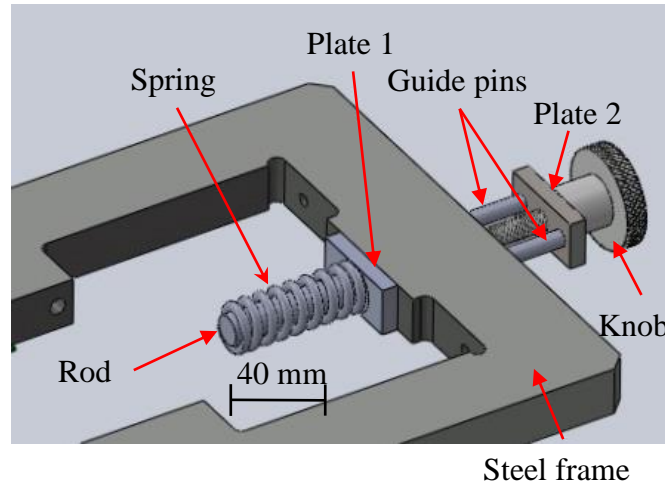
CAD Model of Spring, two blocks and guide pins assembly.
